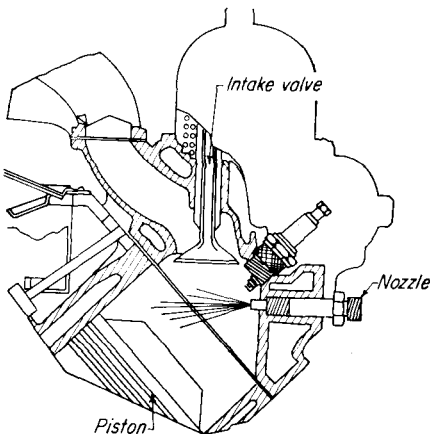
Simplified view showing method of injecting fuel directly into combustion chamber of engine.
